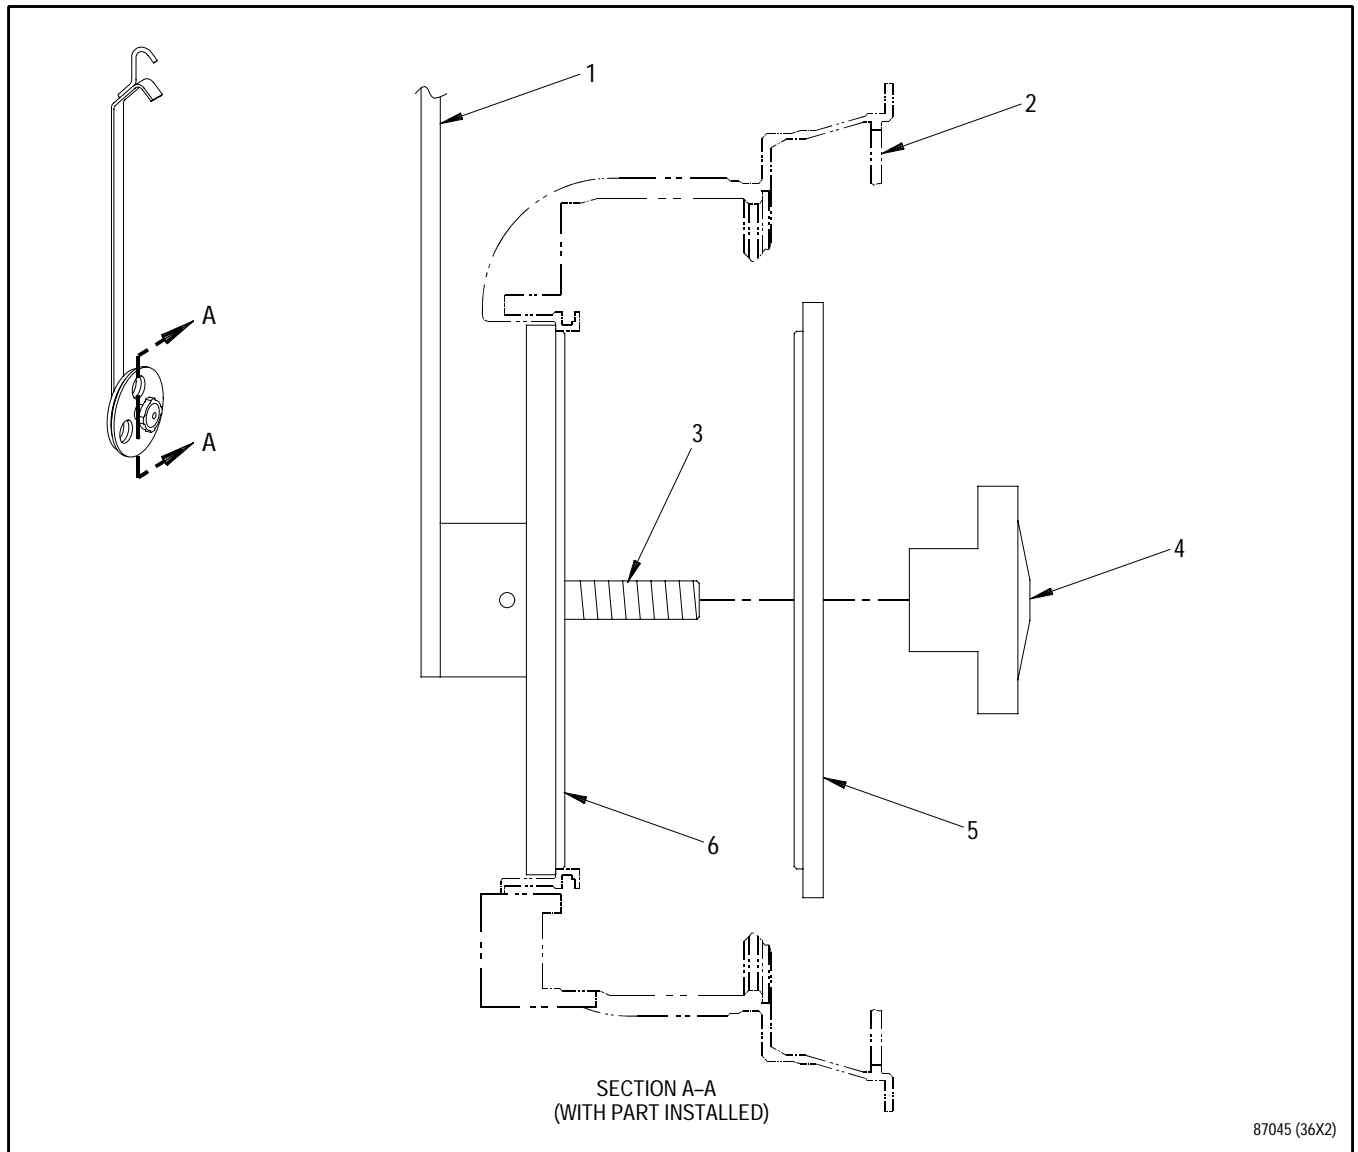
No. 4 Bearing Front Seal Support Assembly - Rear Flange Face Nickel Plating
